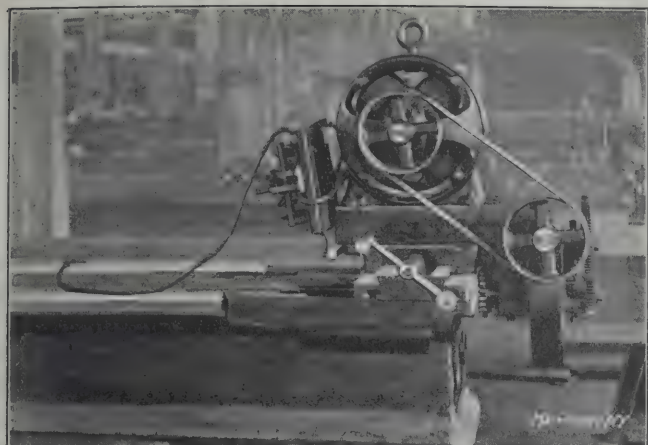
Portable Milling Machine for Facing Ends of Large Lathe Beds
